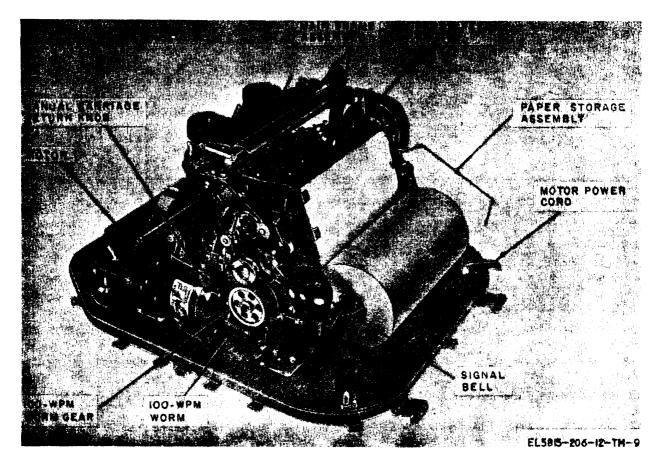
Teletypewriter TT-4(*)/TG, dust cover removed, rear-right-side view
